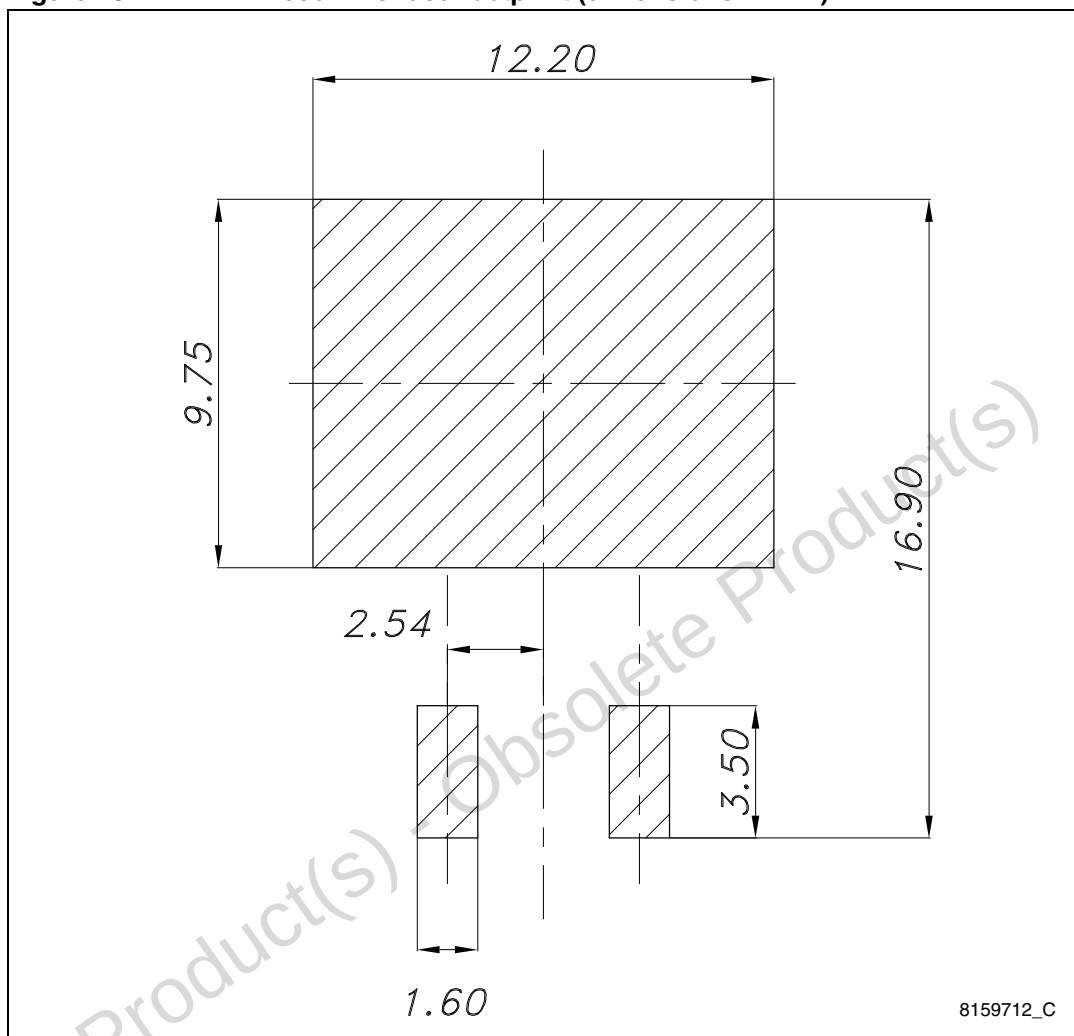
H²PAK-2 recommended footprint (dimensions in mm)
